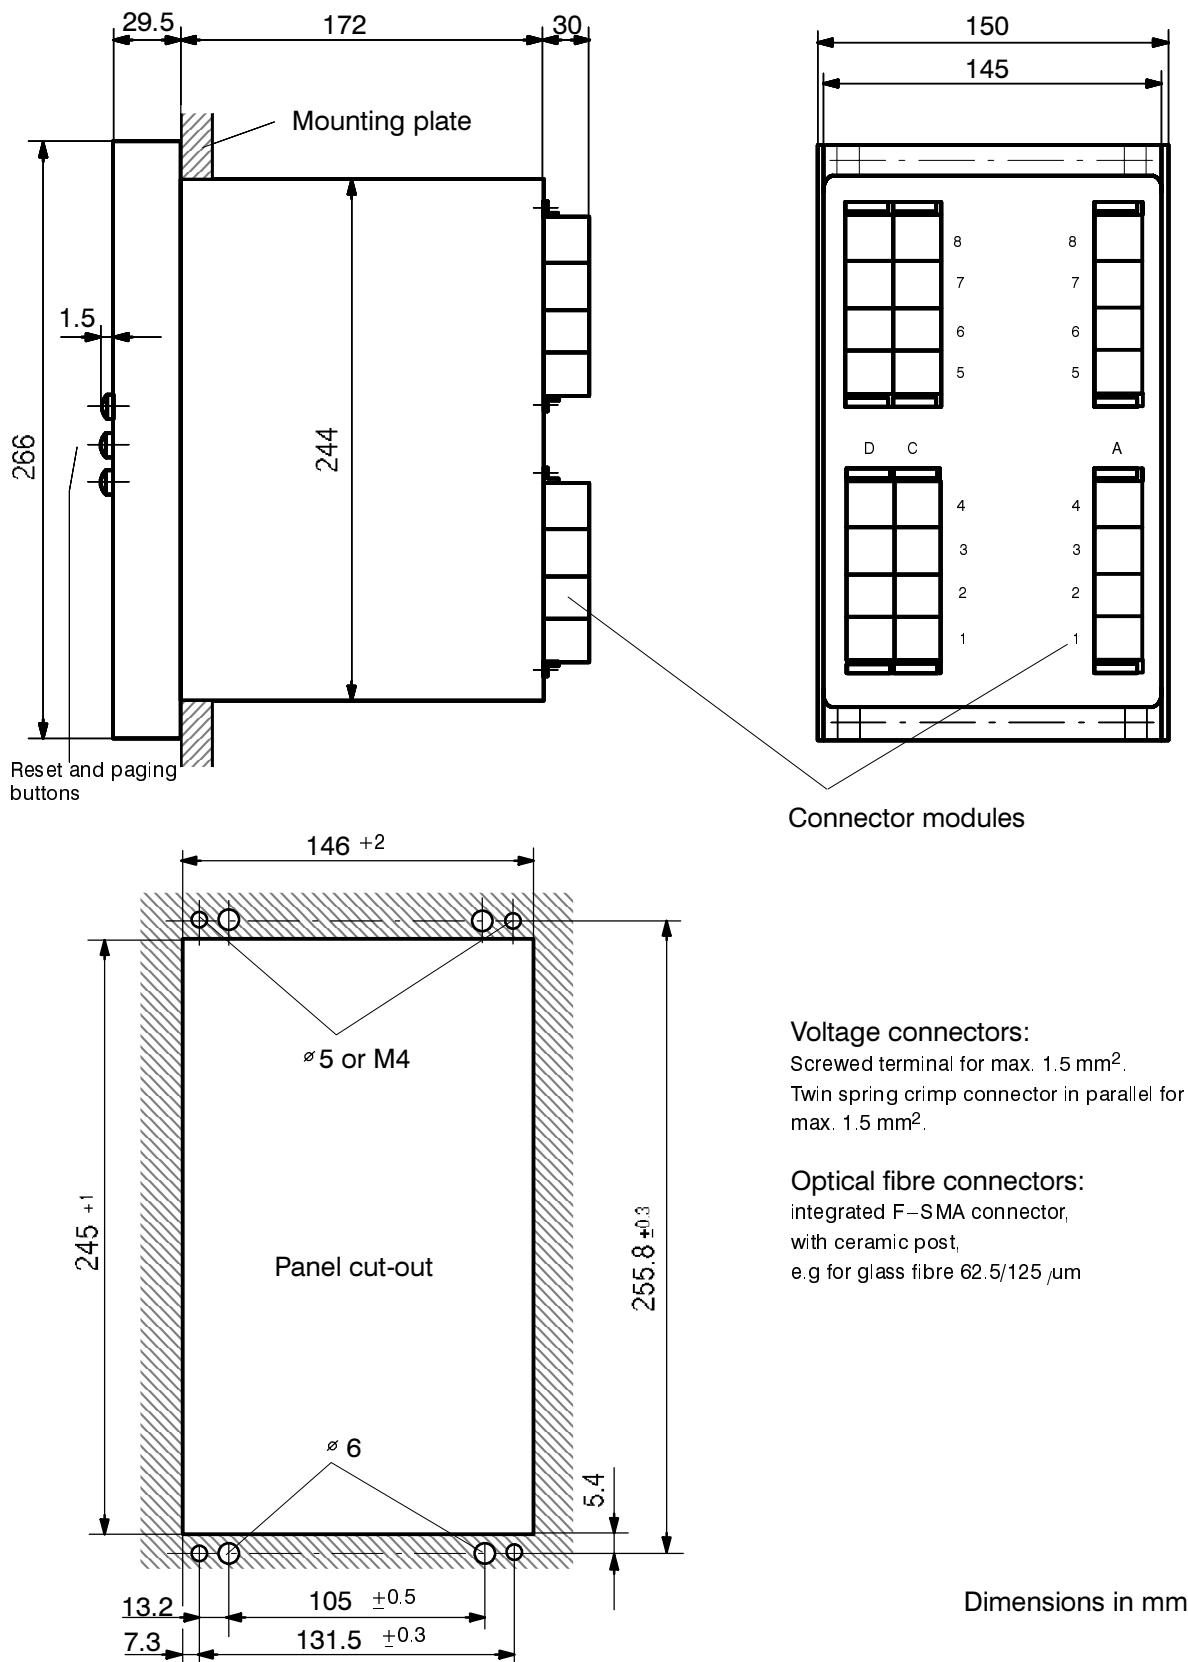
Dimensions for housing 7XP2030-2 for panel flush mounting or cubicle installation
